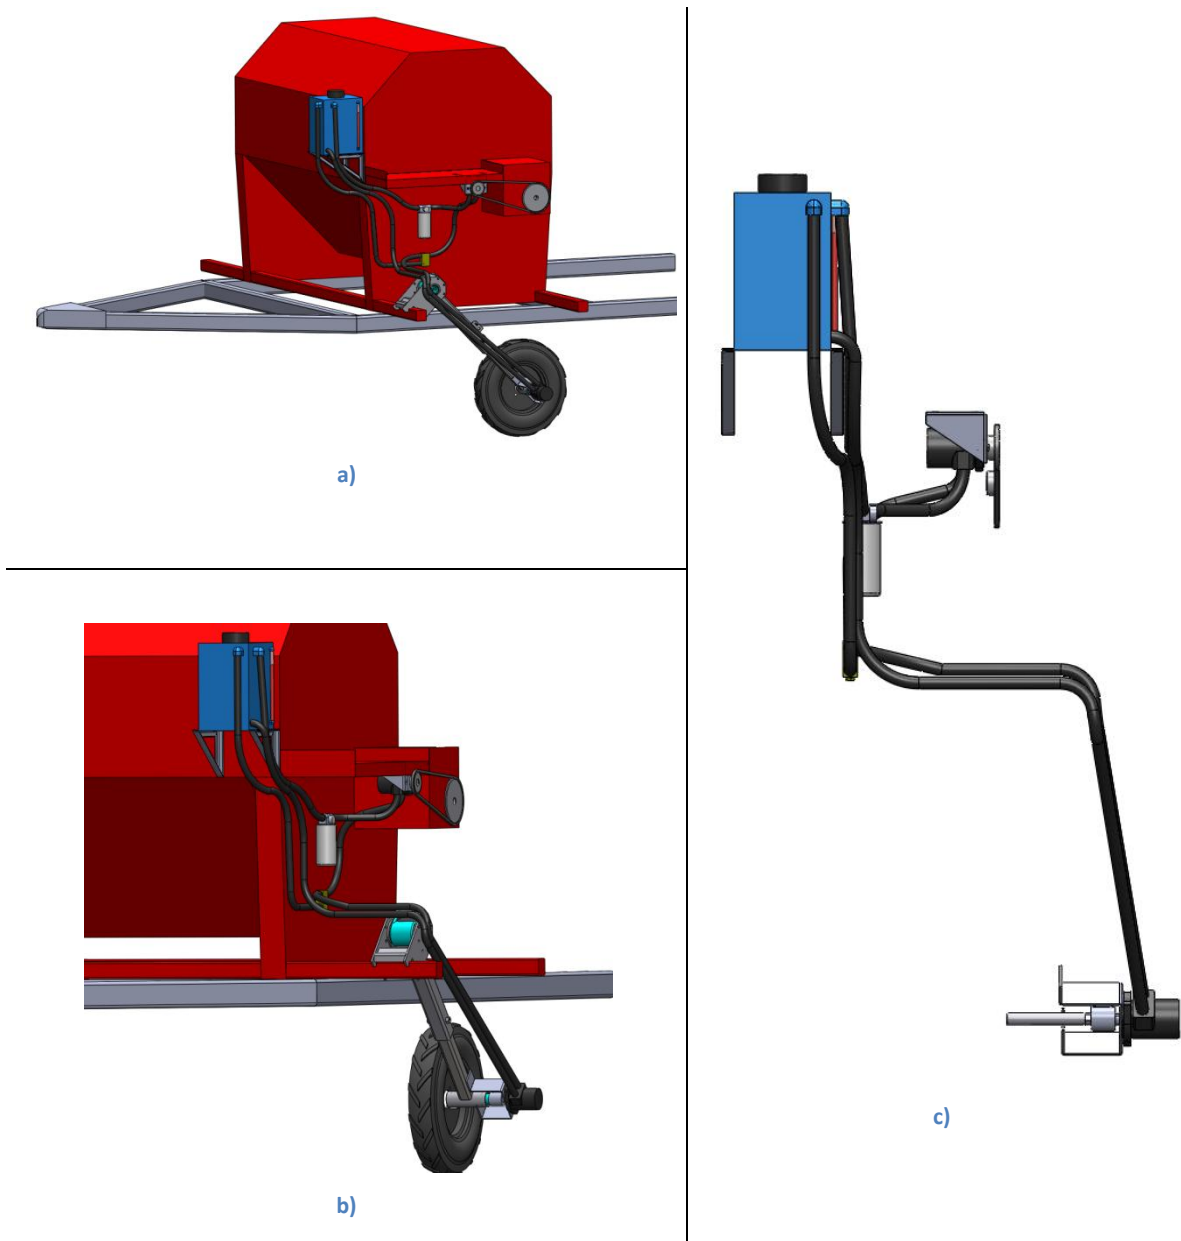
a) Hydraulic drive assembly on the Valmar implement, b) Hydraulic drive assembly close-up on the Valmar implement, c) Hydraulic drive front view
